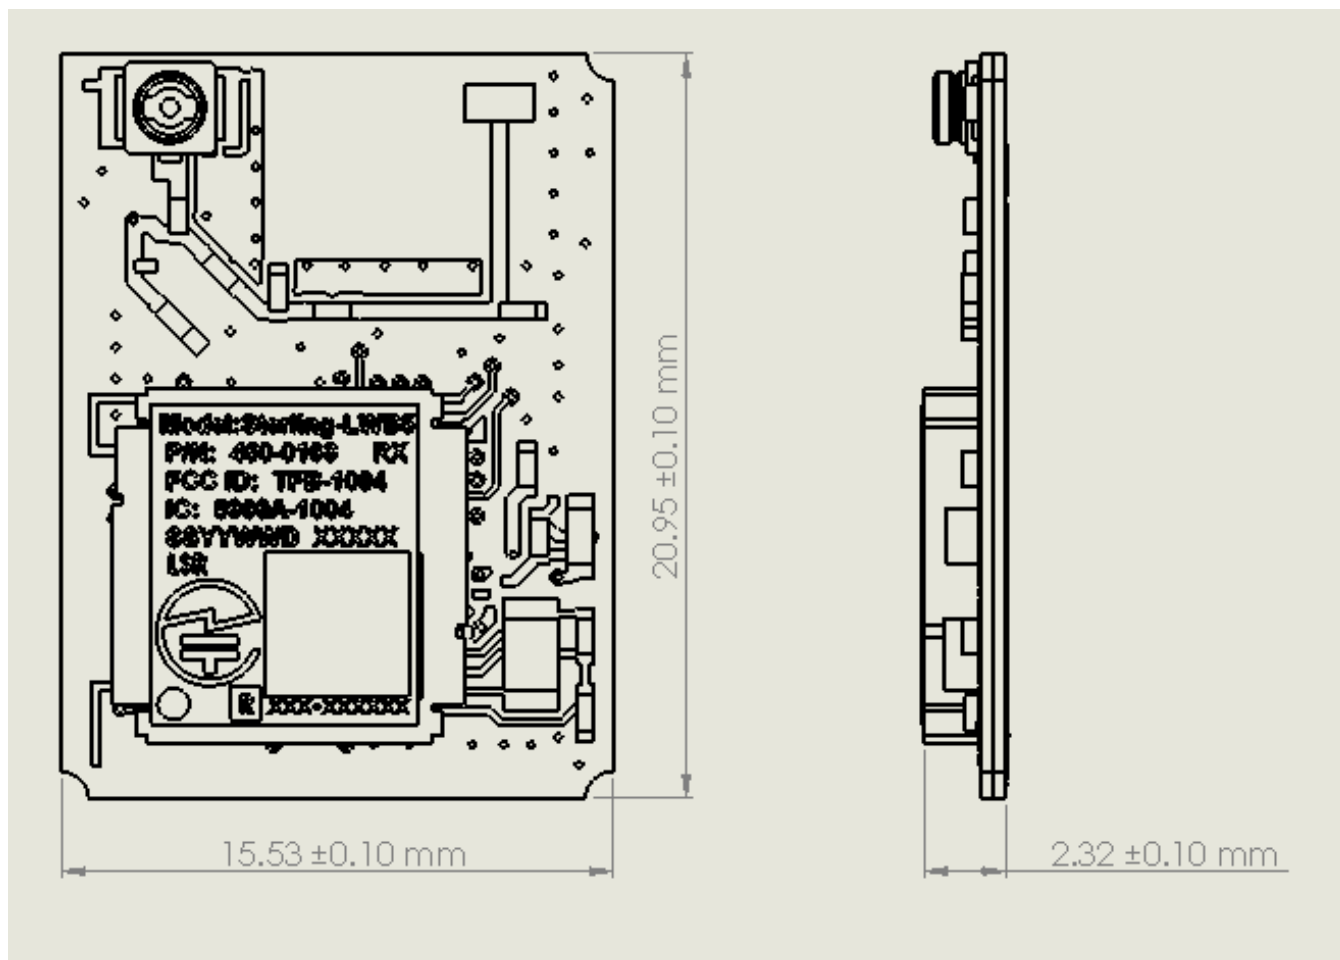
U.FL and Chip Antenna Mechanical Dimensions
